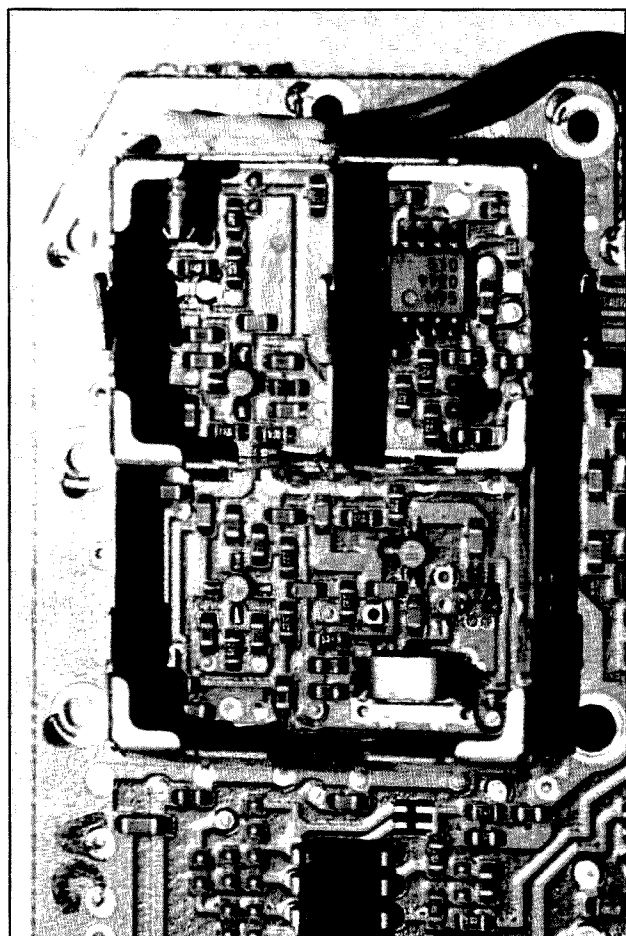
Photo C. Close-up shot of the oscillator and DR (silver rectangle), three transistors, modulus counter (8 pin DIP), inside metal shield compartment. Large 8 pin IC is an OP-27 P/O PLL varactor control circuit.
